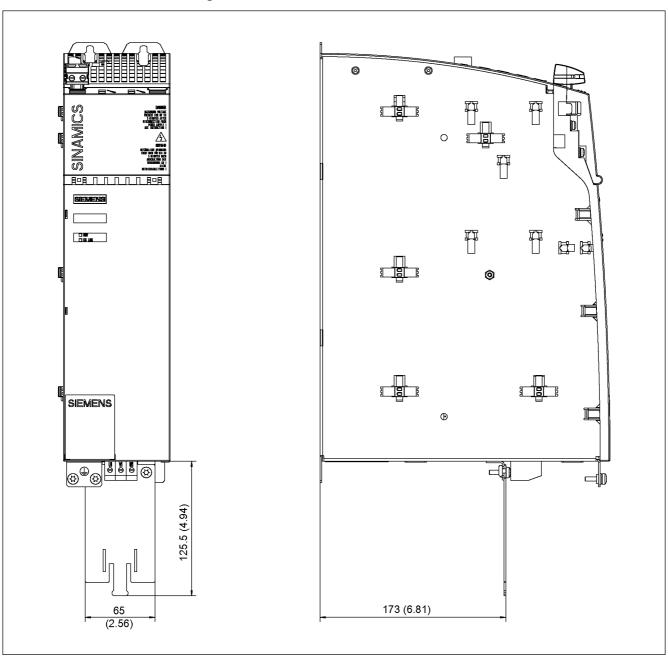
Dimension drawing of shield terminal plate on a 100 mm Line Module with internal air cooling
